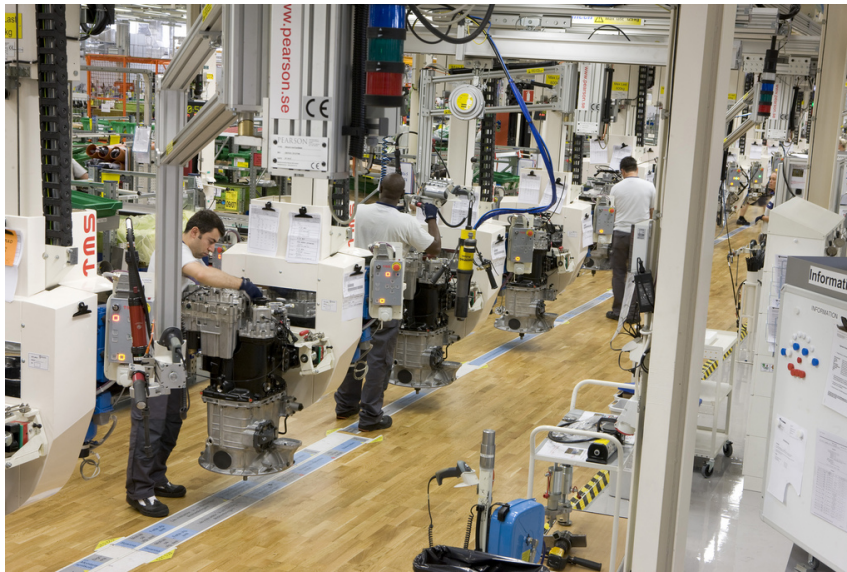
Assembly-line workers working on gear box assembly in Scania [18].
